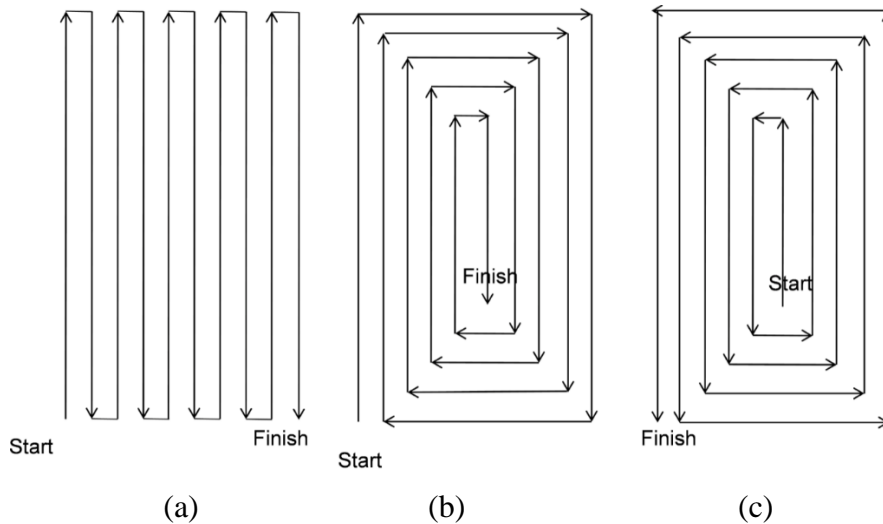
Three types of patterns used in weld-deposition (a) Raster (b) Spiral-in (c) Spiral-out.
